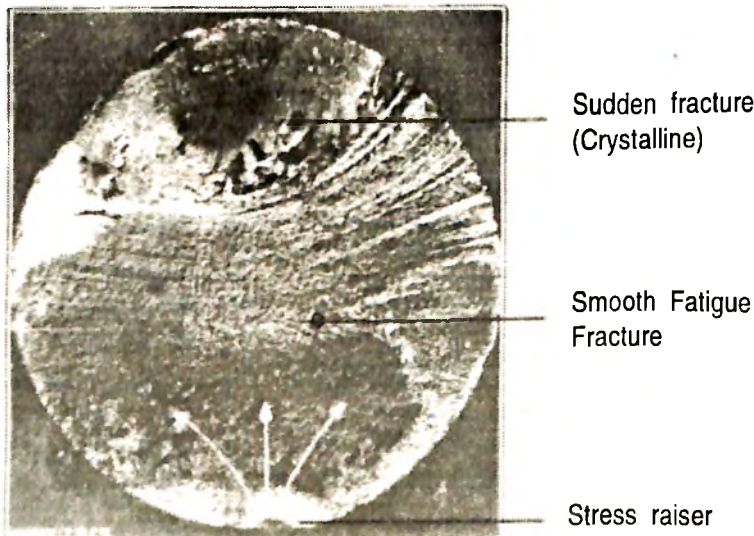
Fatigue fracture of an automobile axle shaft
